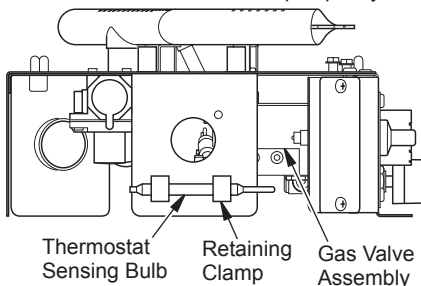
Location of Gas Valve Assembly and Thermostat Sensing Bulb
